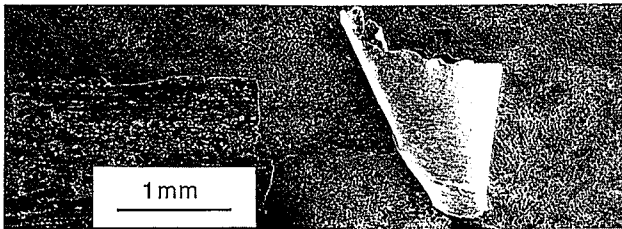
Enlarged view of overlap in titanium disk contact surface (test conditions: 650°C, without lubricating oil)
